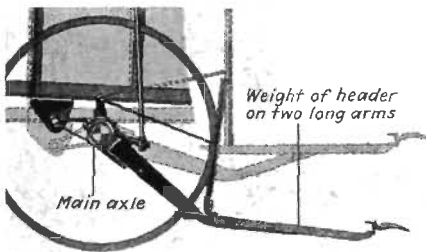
Method of balancing platform. The weight of the thresher counterbalances the weight of the platform.
